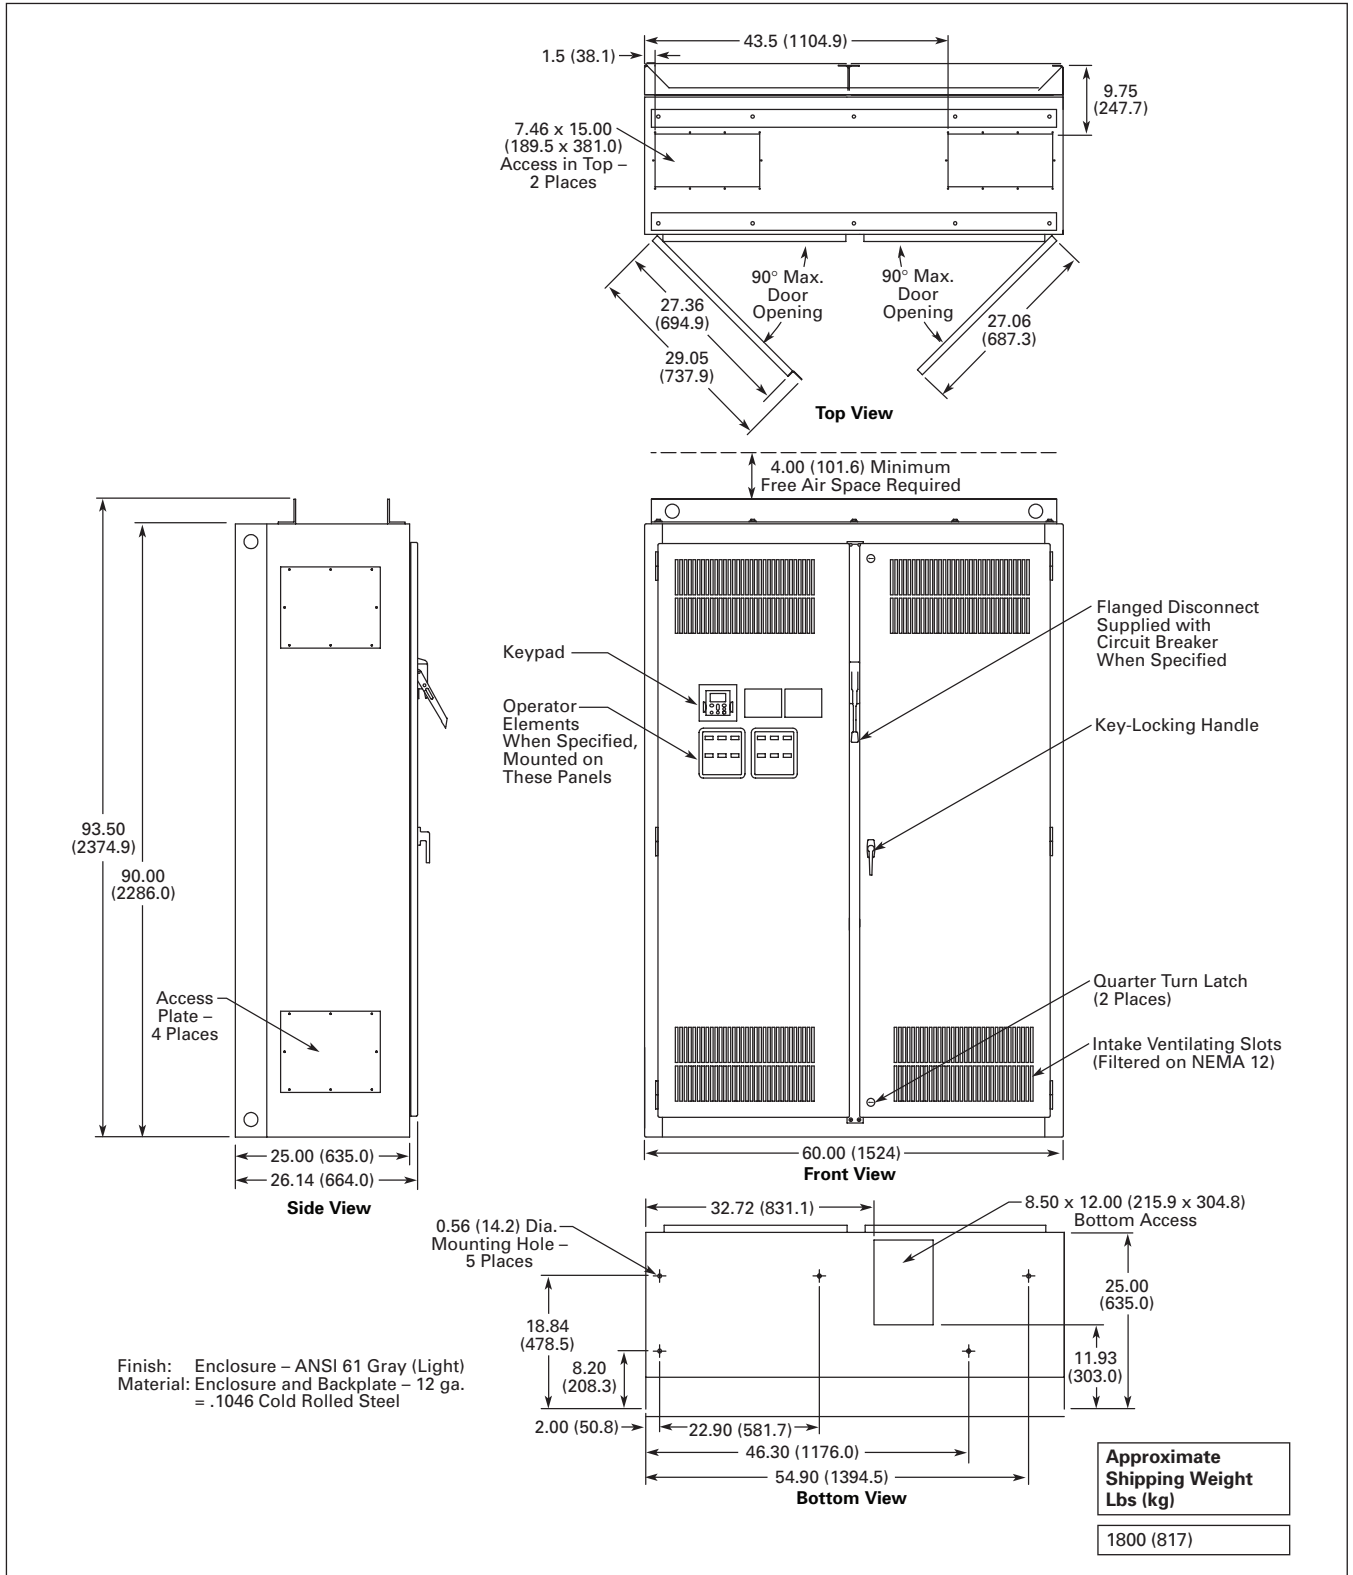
Enclosure Size 9—Approximate Dimensions in Inches (mm)
